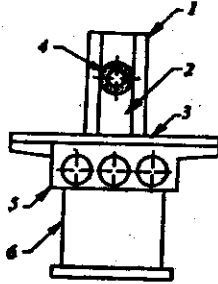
Block diagram of a horizontal spindle surface grinder
